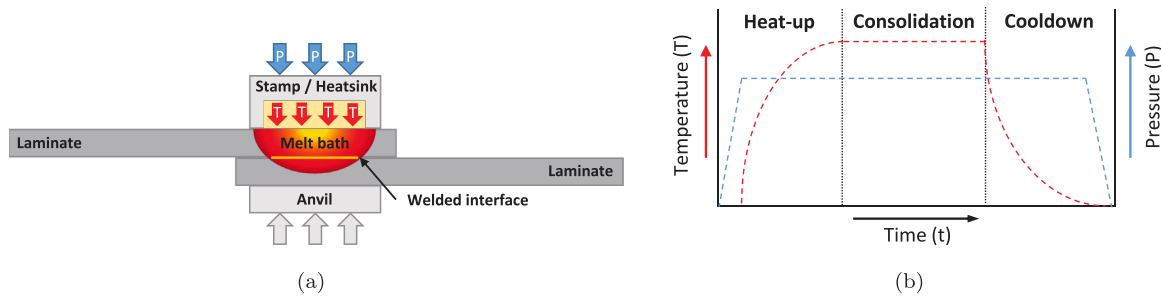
Conduction welding process: (a) Schematic; (b) Typical manufacturing process cycle.
